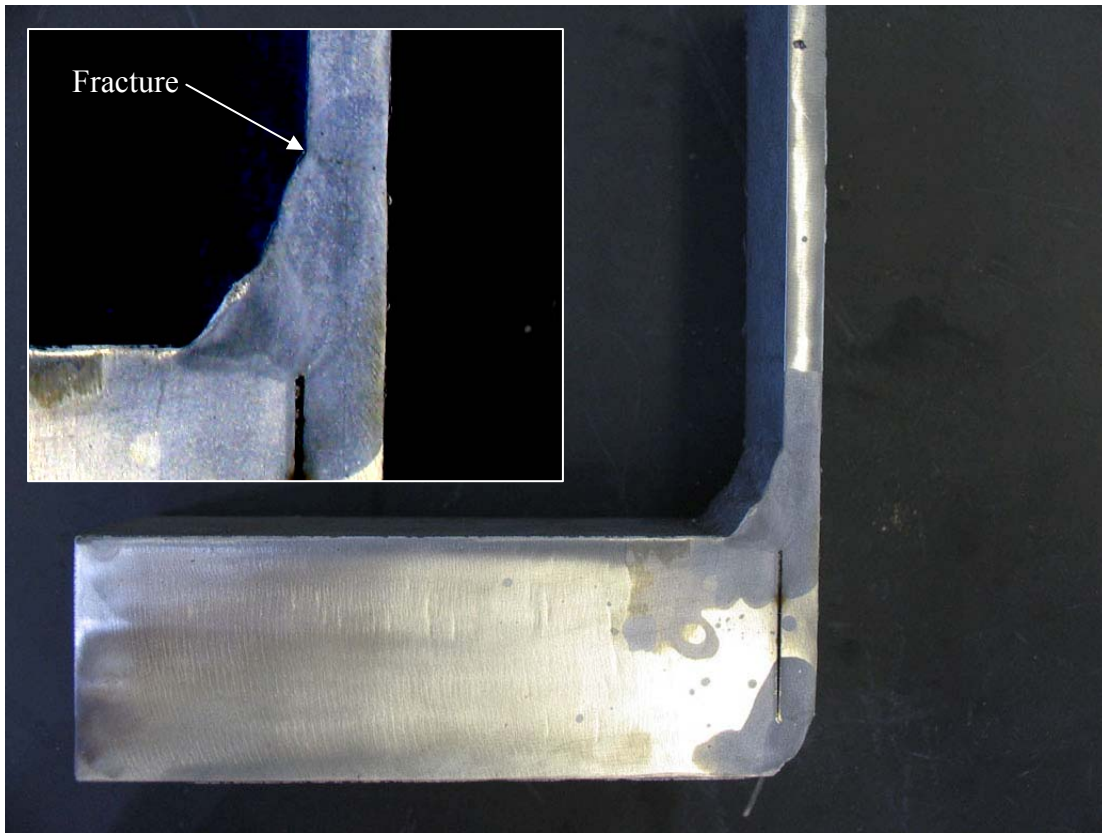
Etched cross section of fillet welded socket connection
